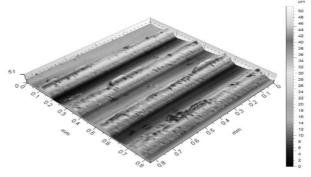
Surface topography of damaged surface for M398 processed by DNMG 110404E-M T9315 geometry of cutting insert
